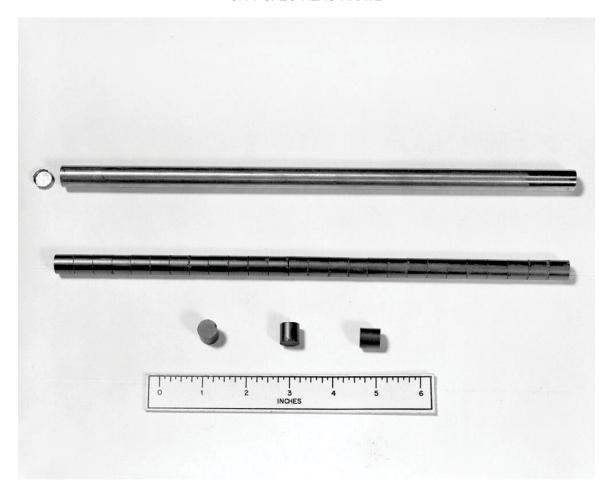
Stainless-Steel Tube (With One End Cap Removed) and Fuel Pellets. a,b
